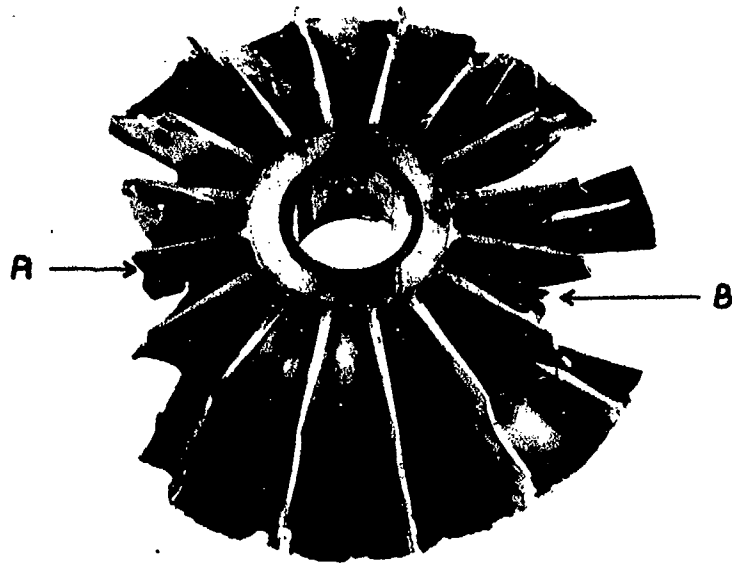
The broken impeller showing the positions of cracks "A" and "B"
